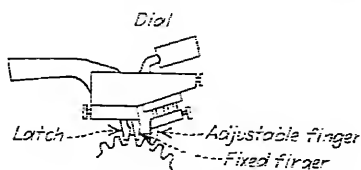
Odonometer for measuring gear-tooth spacing.
